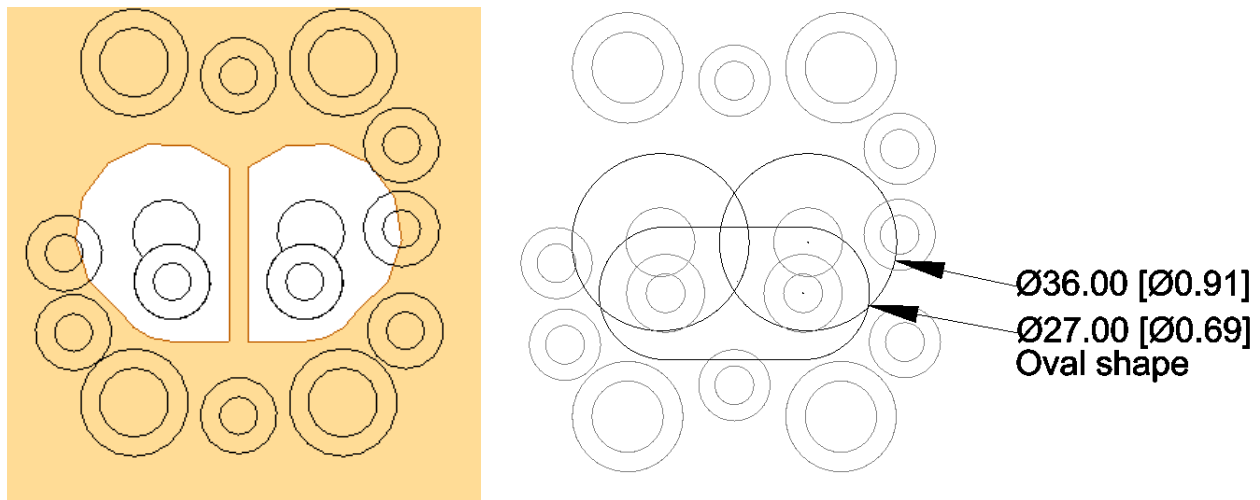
Paladin HD2 Footprint Layer 1 Anti-pad Shape
